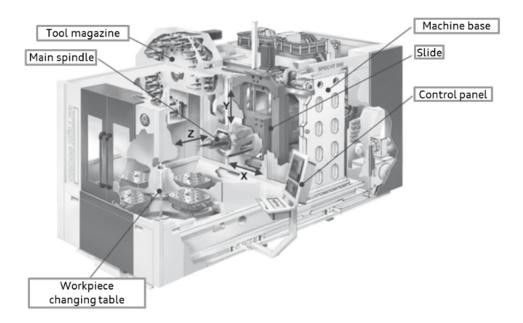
Mechanical machining center regarding to Weck (2005 p. 180)
